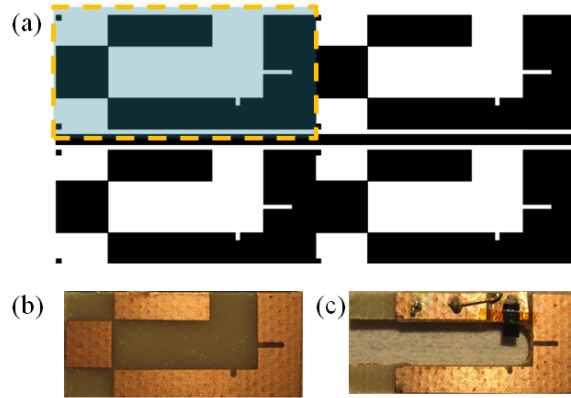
PCB TEM Blade. (a) Mask (b) Blank (c) Machined blank
